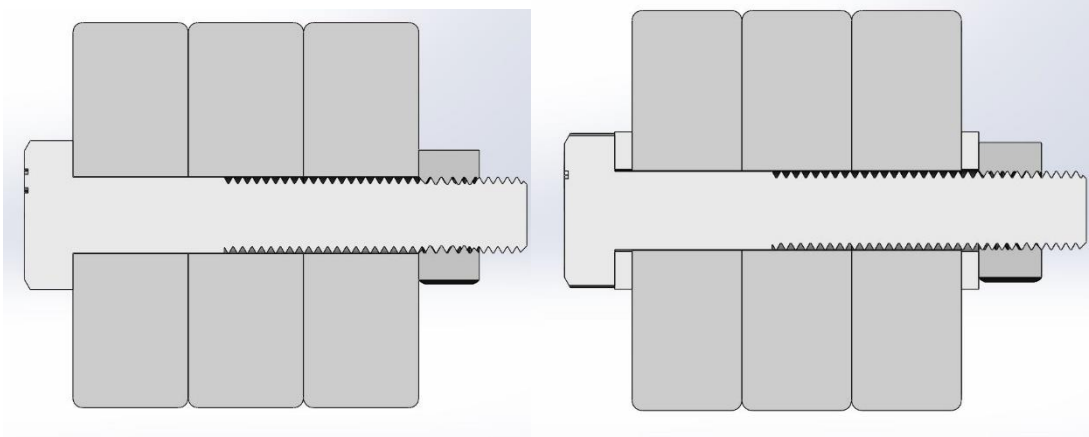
a) Steel Bolted Joint b) Aluminum Bolted Joint
